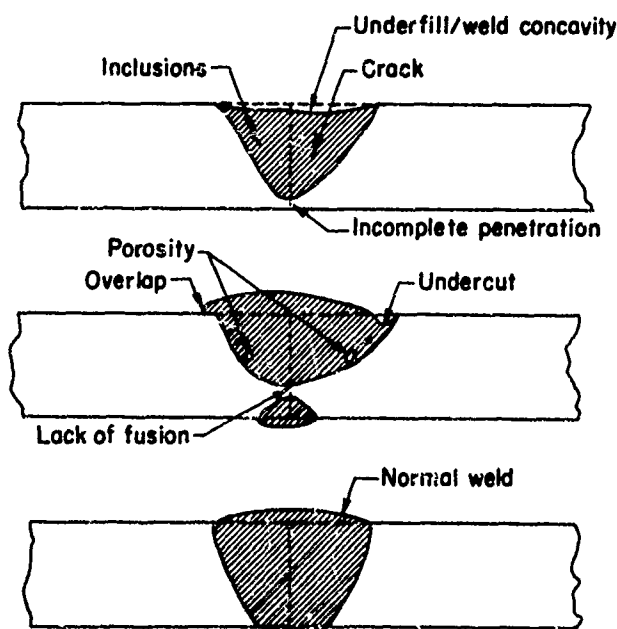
FUSION-WELD DEFECTS
